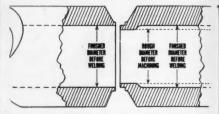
Drawing Showing Preparation of Joint in Tubing Sections Before Welding
